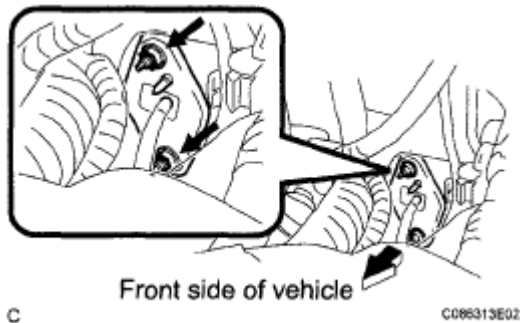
Locating Transmission Control Cable Assembly Nuts
